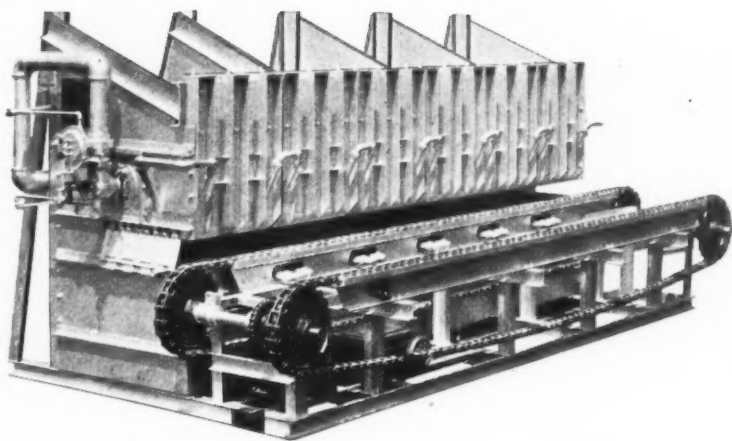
Slot Forge Furnace for Heating the Ends of the Housings Preparatory to Upsetting
